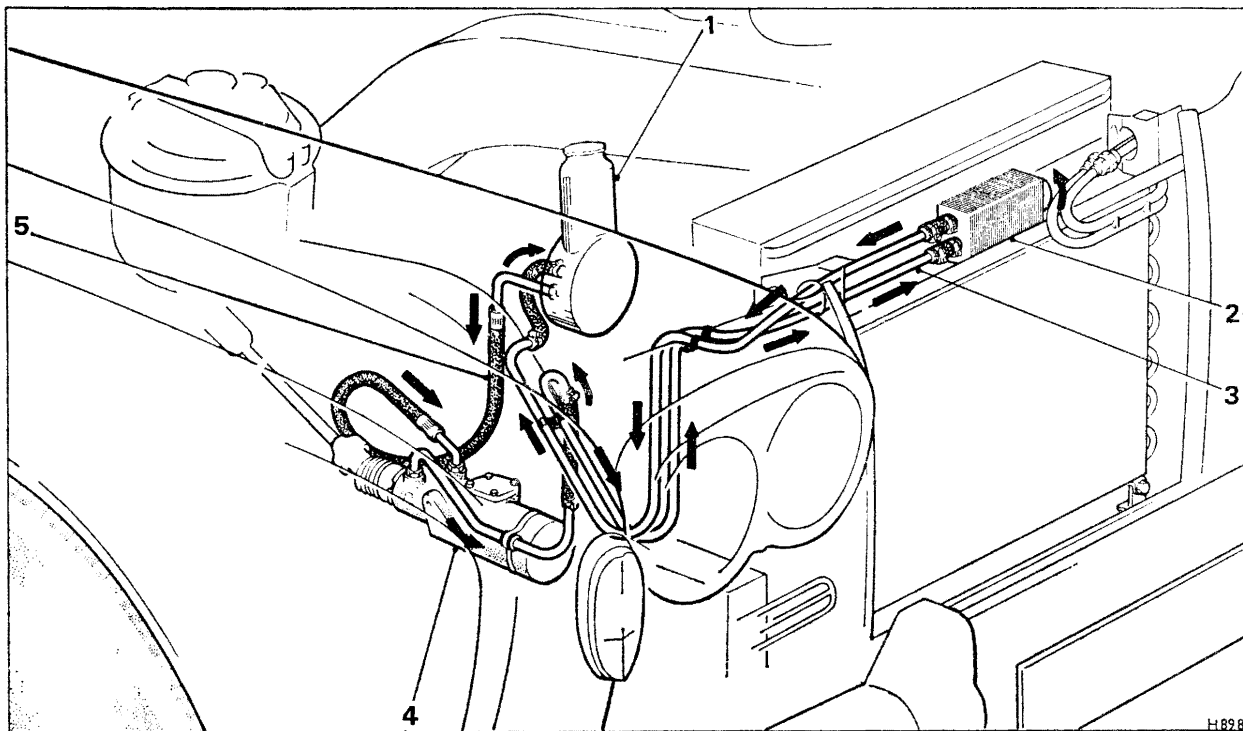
STEERING SYSTEM PIPES AND HOSES—RIGHT-HAND DRIVE CARS
